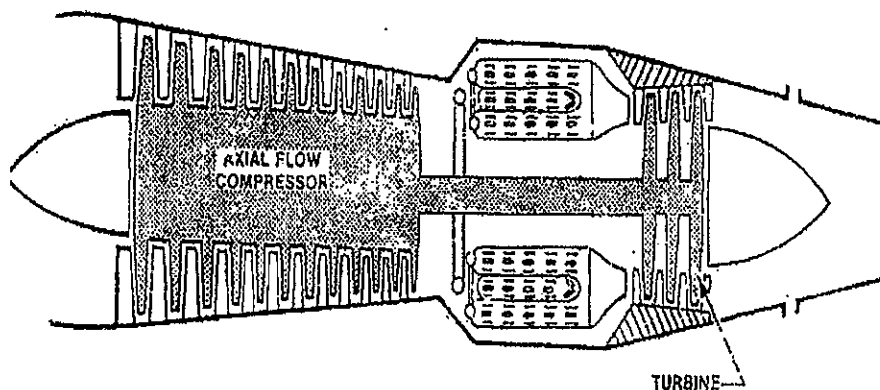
A-17 A single-spool axial flow compressor is used in this engine.
